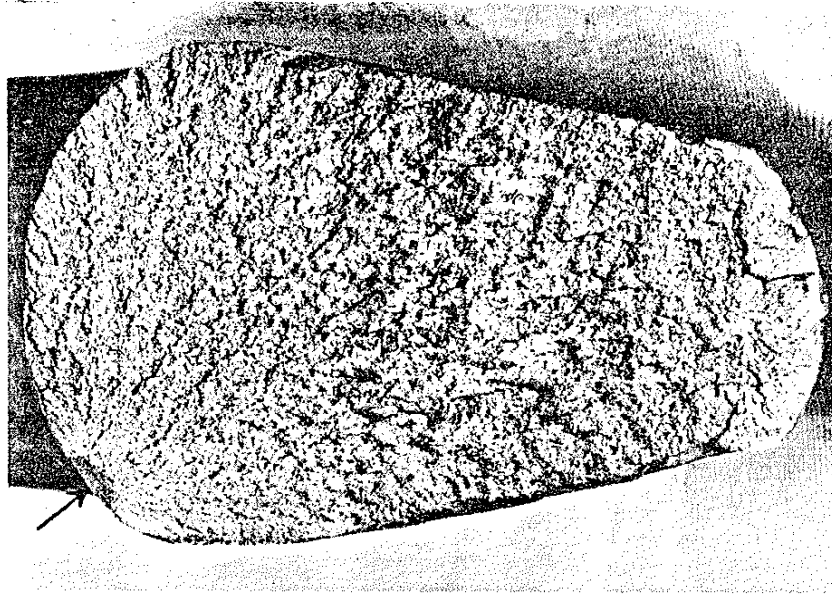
Fracture Surface of Crane Hook Showing
